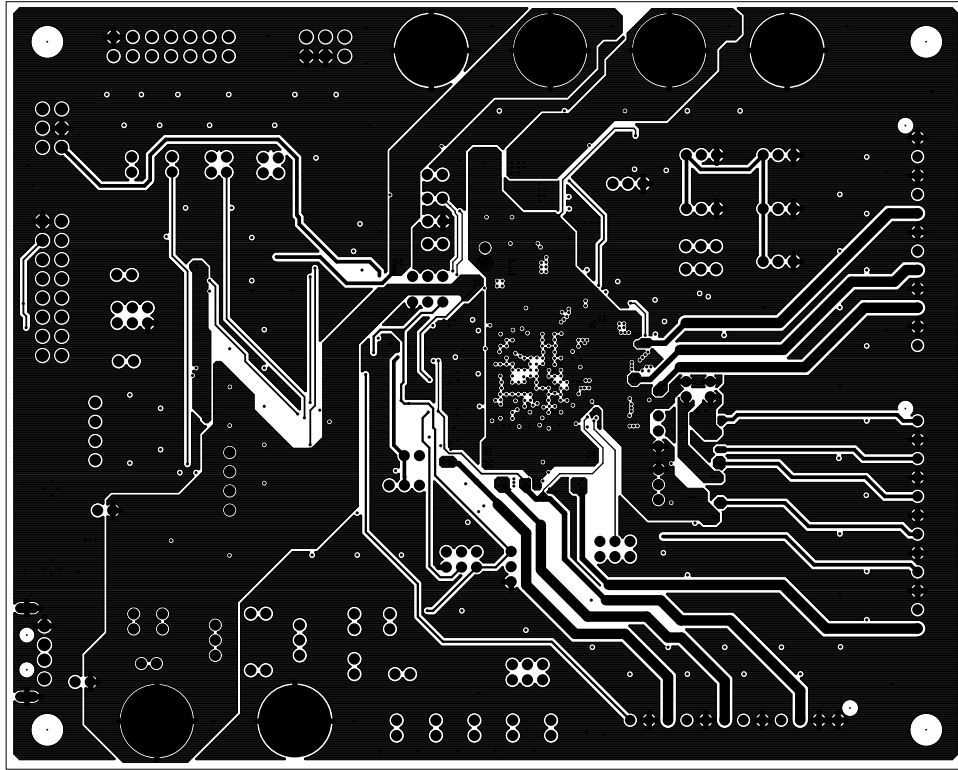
KIT34708VMEVBE (Rev. B) Inner 2 Layer Layout
